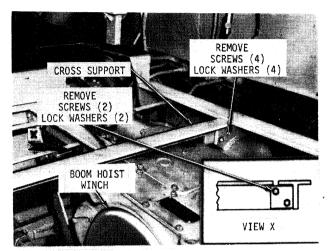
Main hydraulic pump unloading valve - removal and installation.
